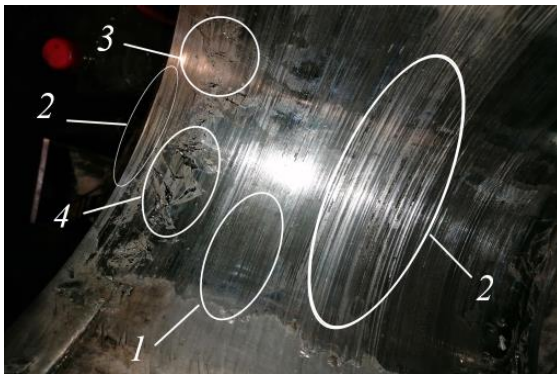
Typical combined defects of a journal bearing liner
